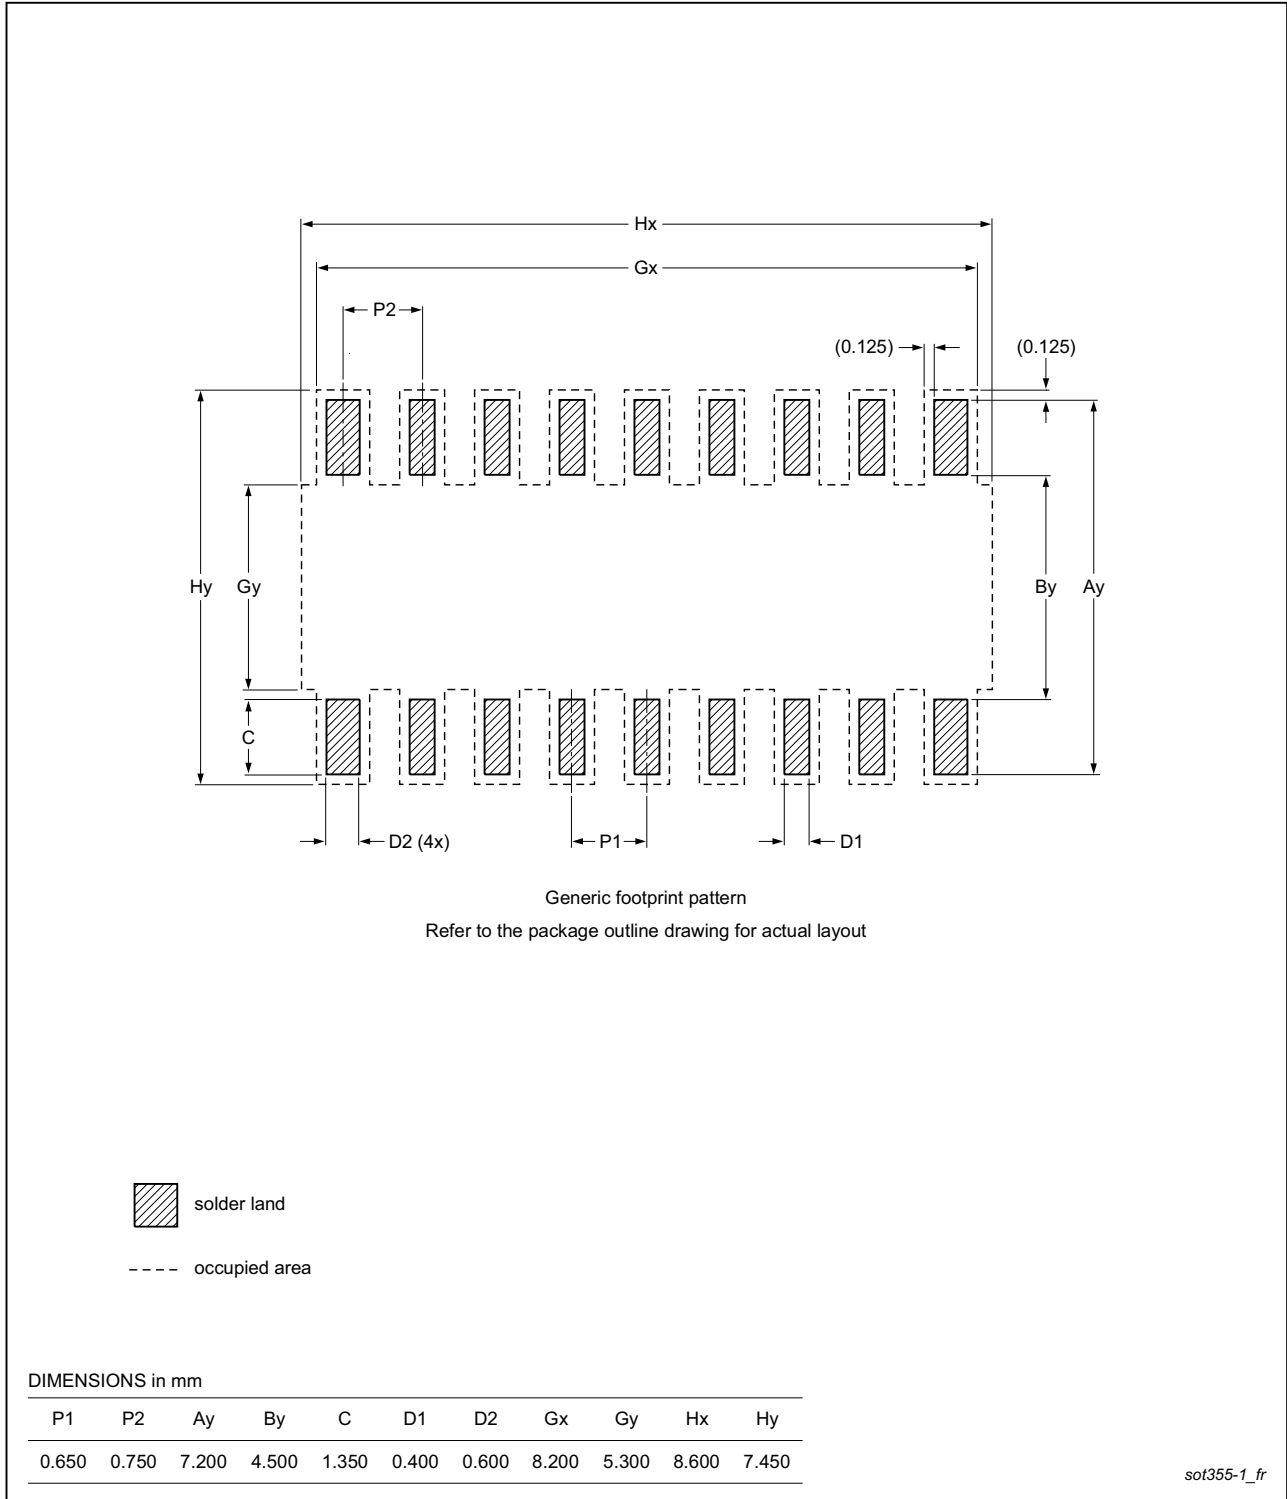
PCB footprint for SOT355-1 (TSSOP24); reflow soldering
